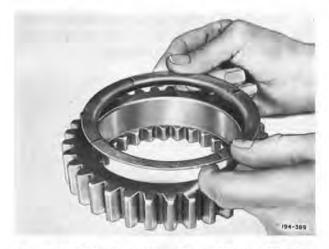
Installing Gear Thrust Washer On Hi-Range Gear
